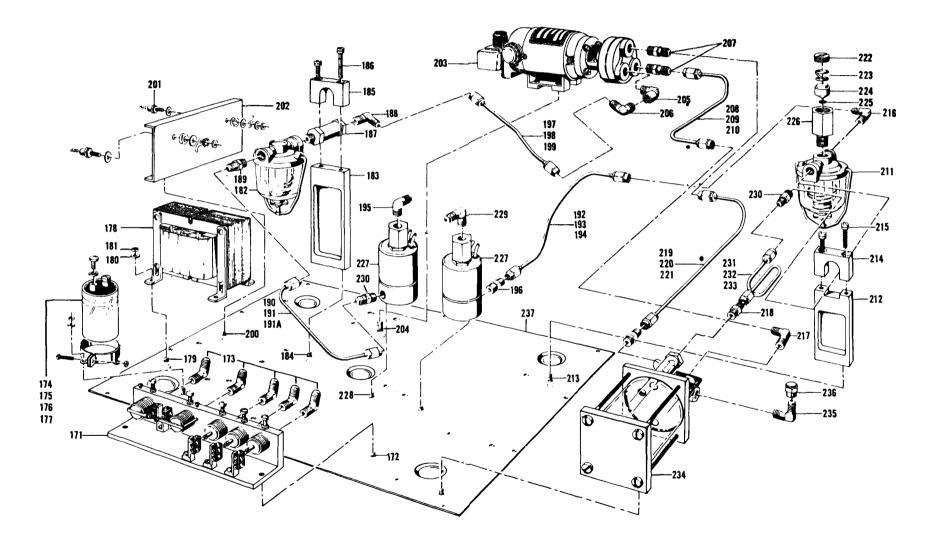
Tester Assembly (Sheet 2 of 2 Sheets)
